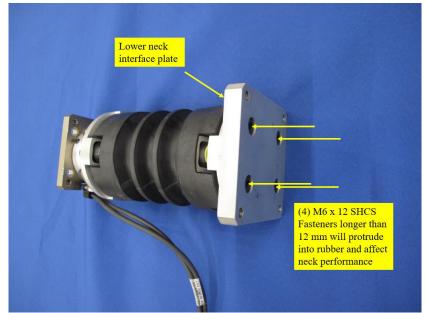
Fastening the lower neck interface to the bottom of the neck assembly.
